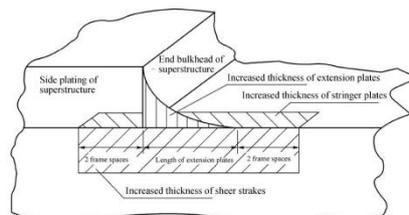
Reinforcement of superstructure end deck and side shell plating
